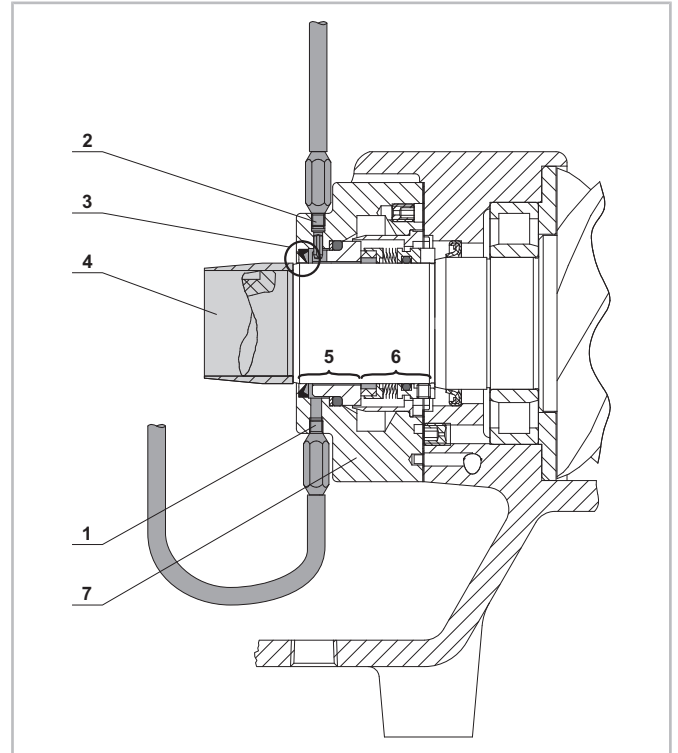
Shaft seal OS.(A)74-EX in special design for use in potentially explosive areas, oil barrier is shown in dark grey.
